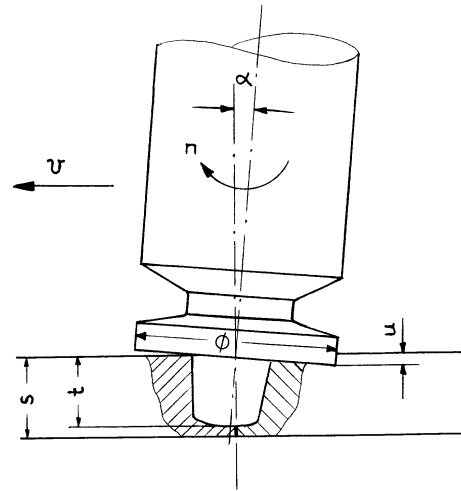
Friction stir welding - tool- and processing parameters [2]
